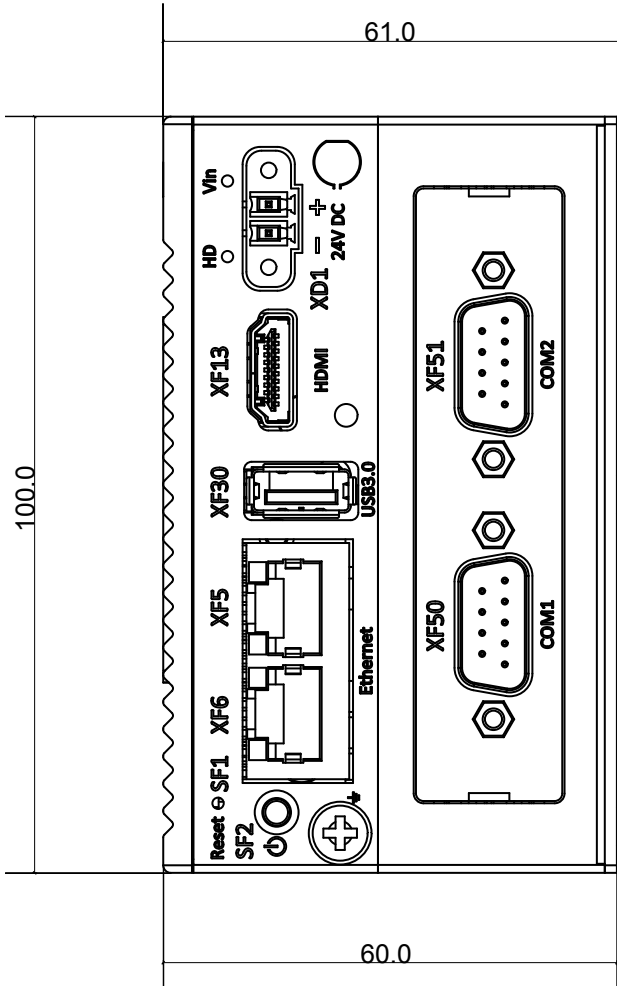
Mounting dimensions for device variant NC, top-hat rail mounting
